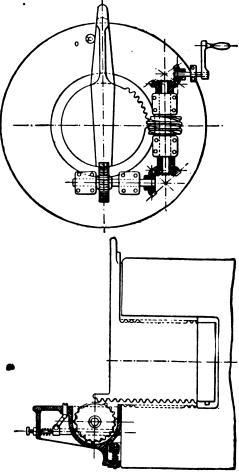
Parts of the Krupp wedge breechblock for medium and large calibers.
